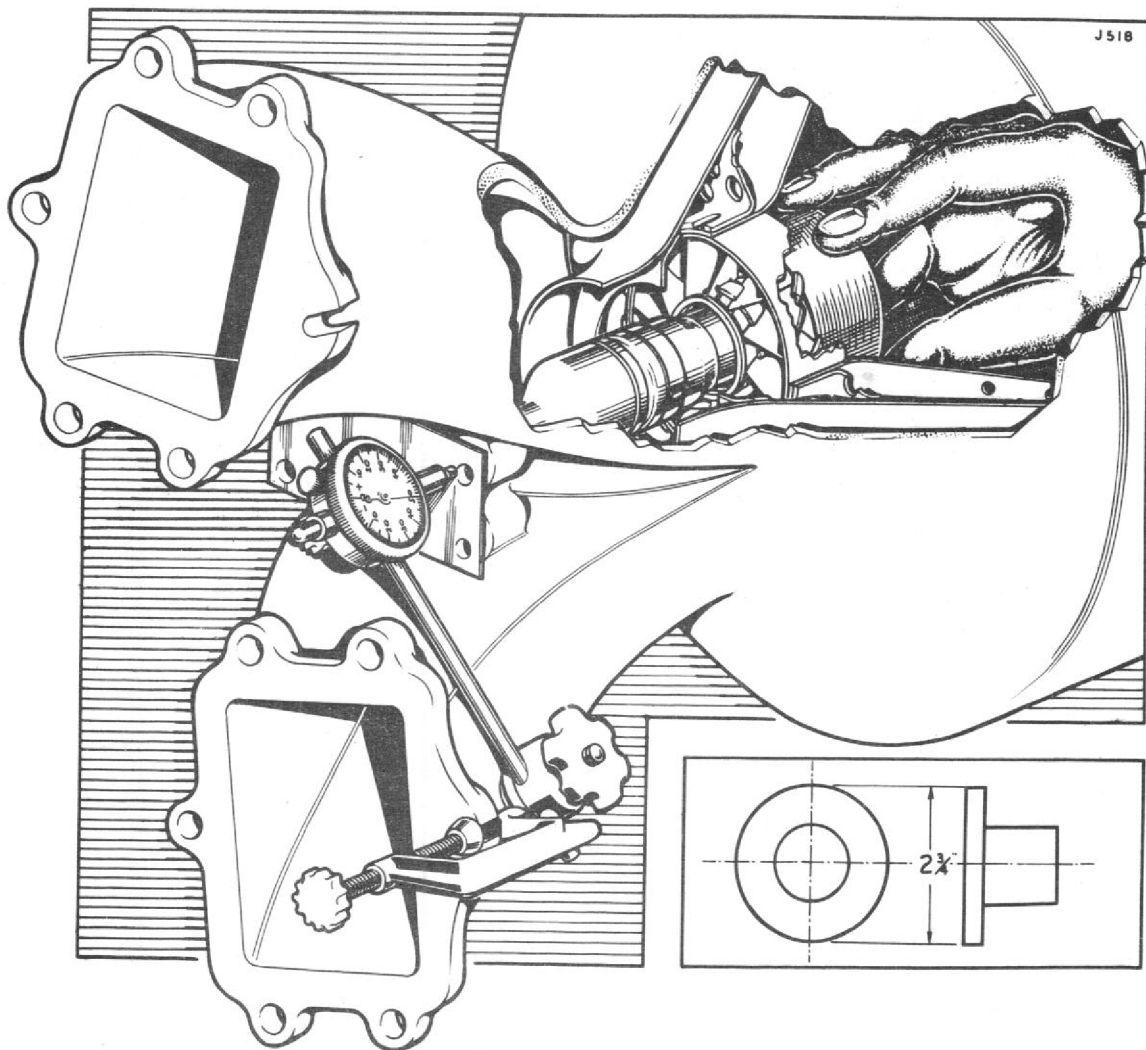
Alternative method of measuring burner protrusion using a dial test indicator, with inset showing a tool which could be improvised.
